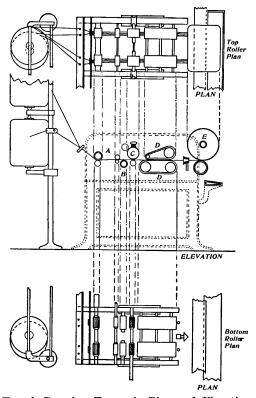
French Drawing Frame in Plan and Elevation.—A, back drafting rollers; B, porcupine; C, front drafting rollers; D, rubbing leathers; E, balling head.
